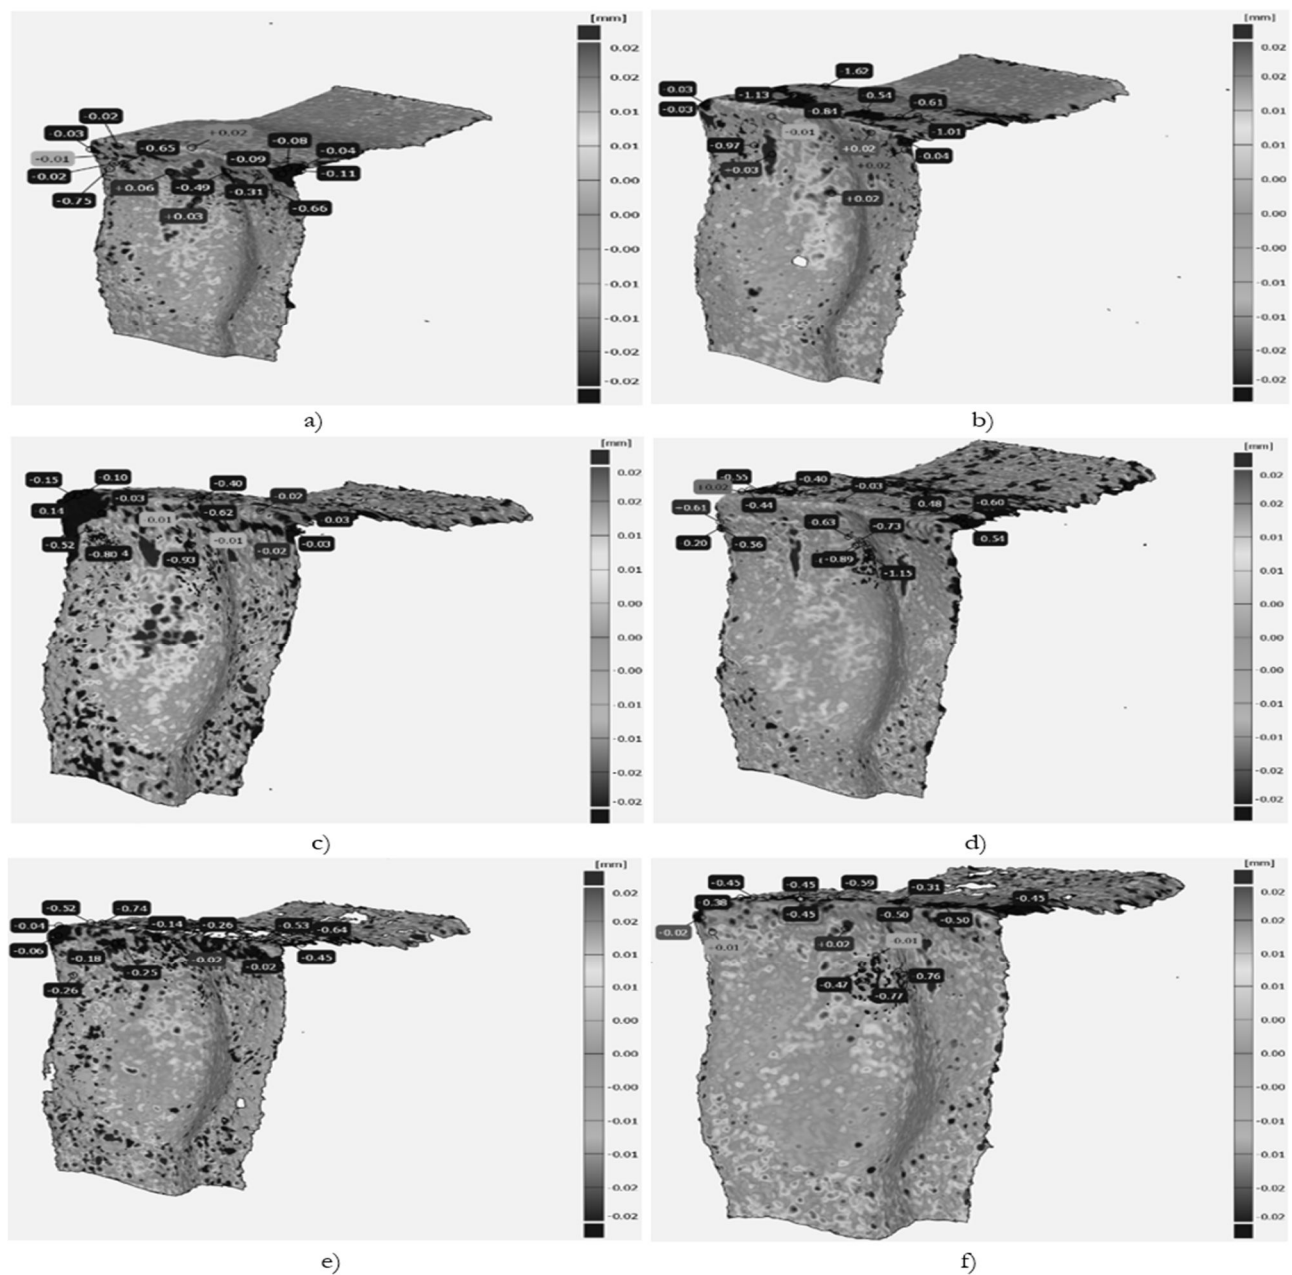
Tool wear (a) insert A1 - mat. 100Cr6; (b) insert B1 - mat. 100Cr6; (c) insert C1 - mat. 100Cr6; (d) insert A1 - mat. 316L; (e) insert B1 - mat. 316L; (f) insert C1 - mat. 316L
